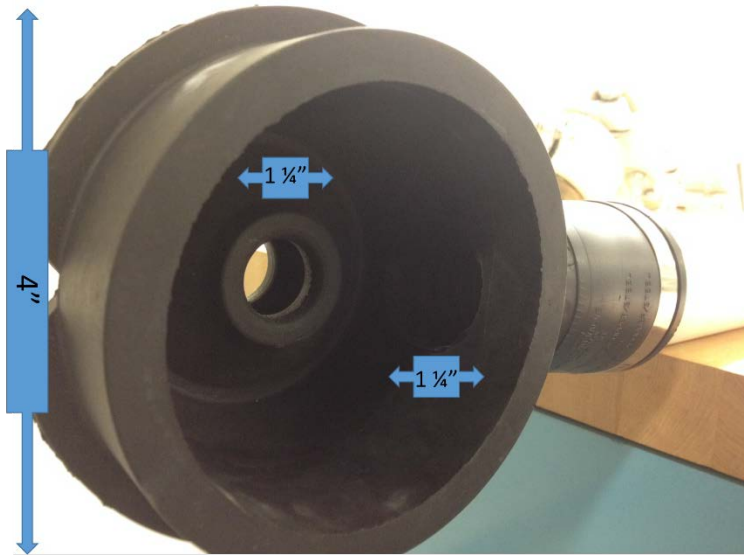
DustControl® pneumatic rock drill hood dimensions
